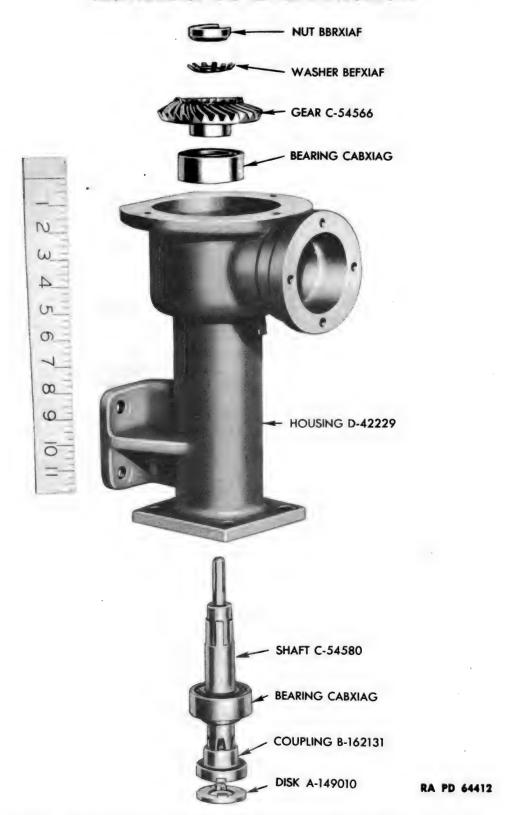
Upper Traversing Mechanism Gear Shaft Assembly— Exploded View
